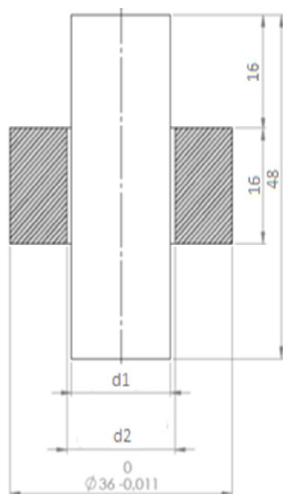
Dimensions and shape of the cylindrical adhesive joints
